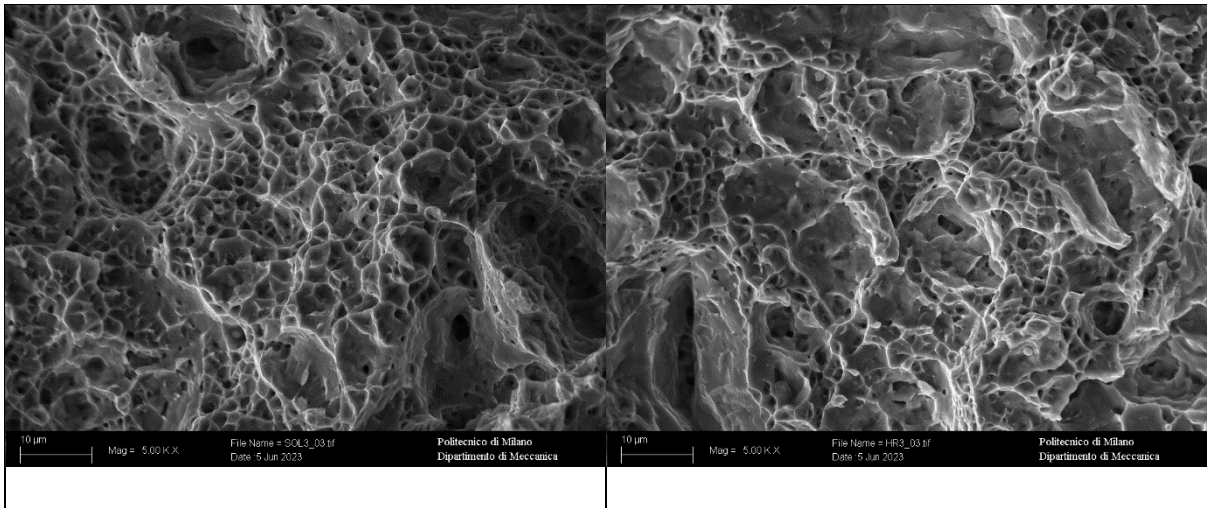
Fracture surface with dimples-like shape in laser welded specimen
